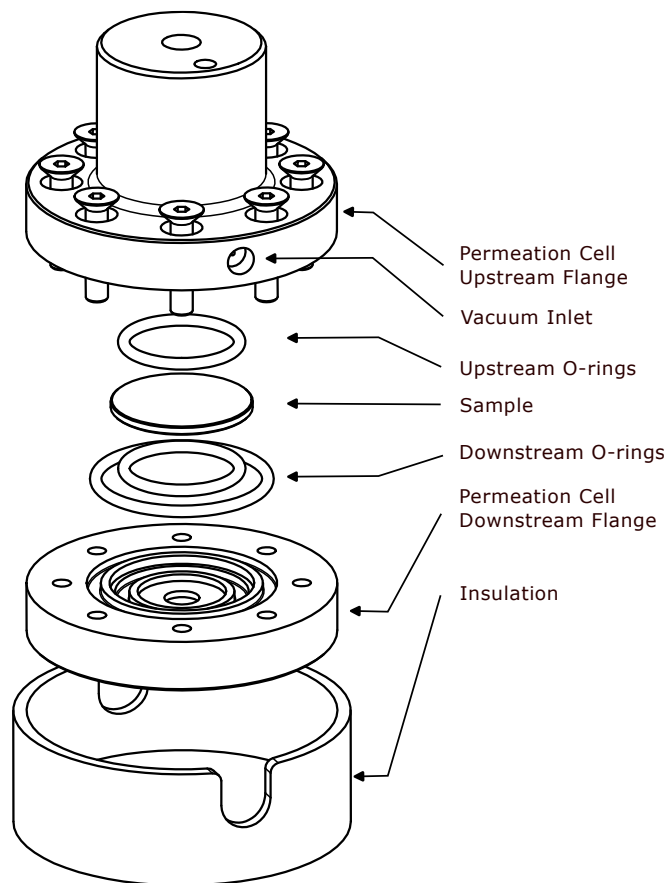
Exploded assembly view of the cell used for the permeation experiments. The band heater is not shown.
